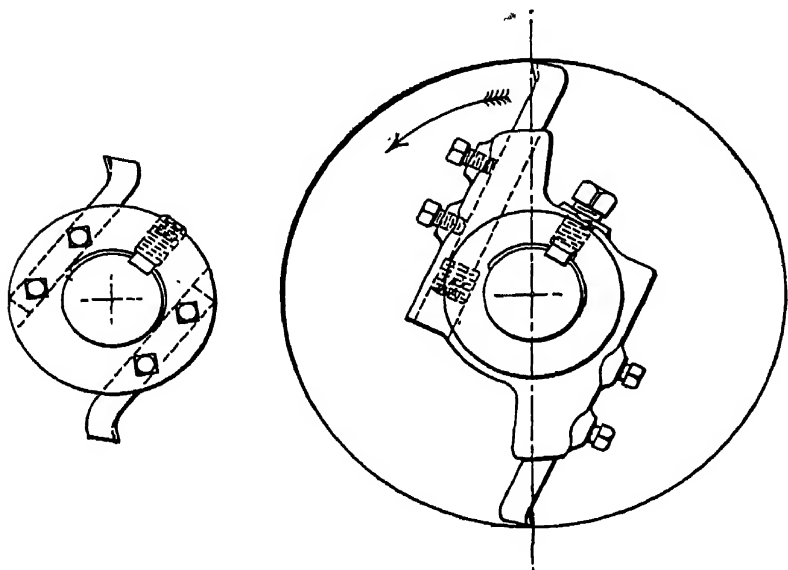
PEARN-RICHARDS BORING HEADS DESIGNED TO GIVE SMOOTH CUTTING
